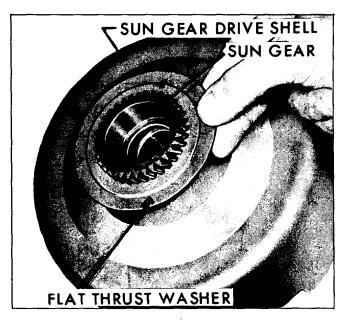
G-116 Removing or Installing Rear Thrust Washer
